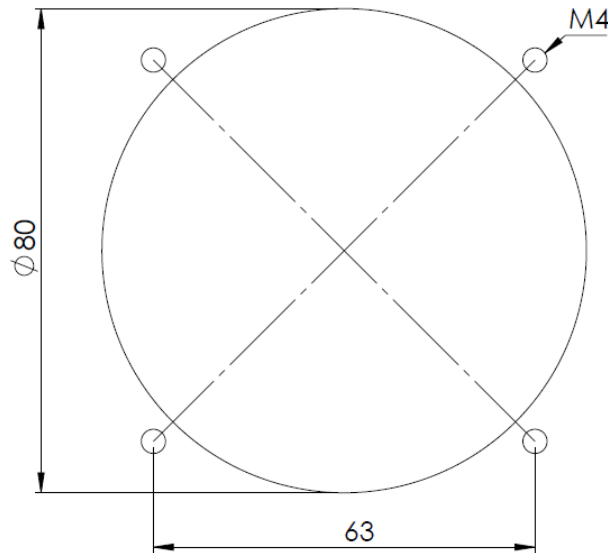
Standard 80 mm panel cutout and M4 hole spacing
